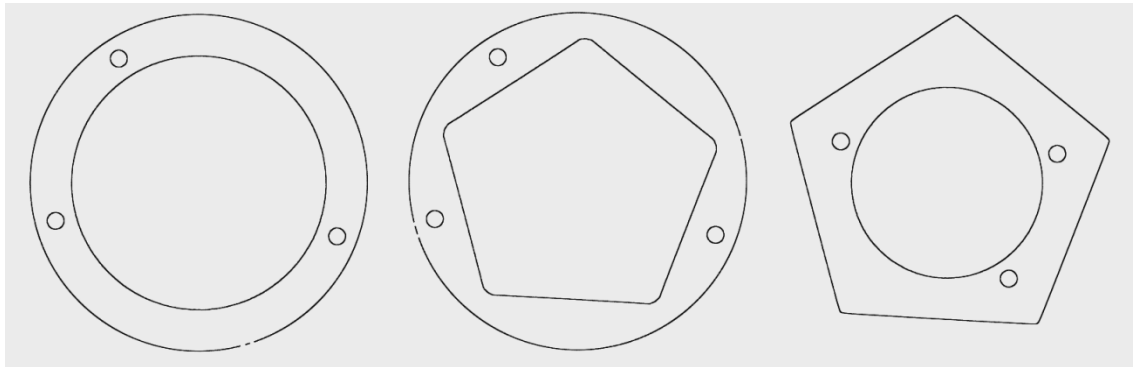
Cross-sections of the aluminium multi cross-section workpiece evaluated using GOM inspect.
